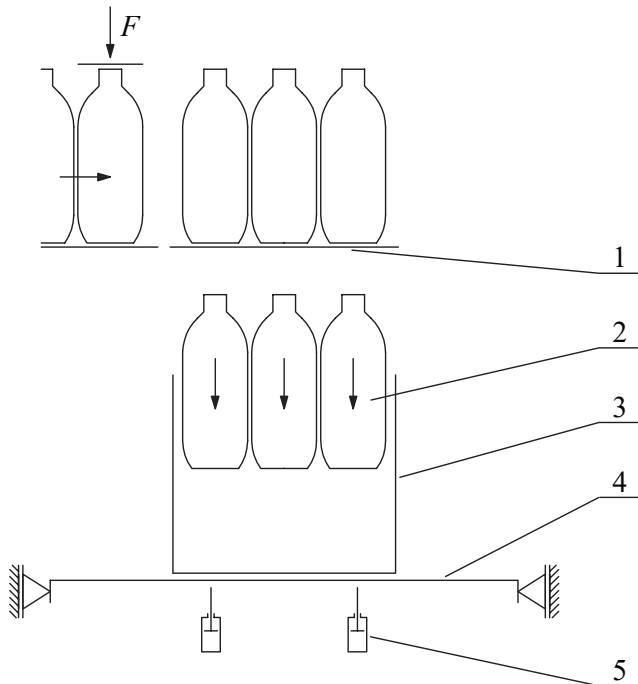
Plate load and support diagram in the drop packer: 1 – top conveyor, 2 – bottle, 3 – cardboard box, 4 – analysed slide plate, 5 – damping element
